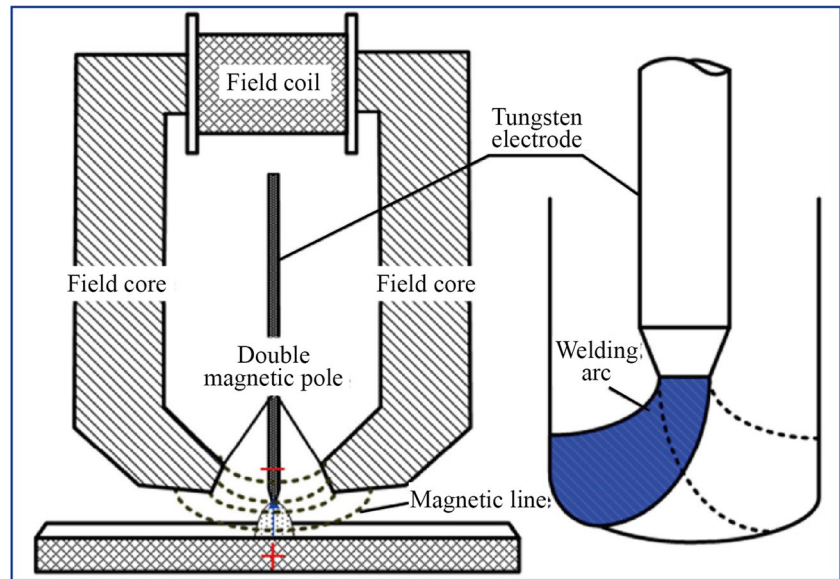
Narrow gap TIG welding system with an external transverse magnetic field [53]
